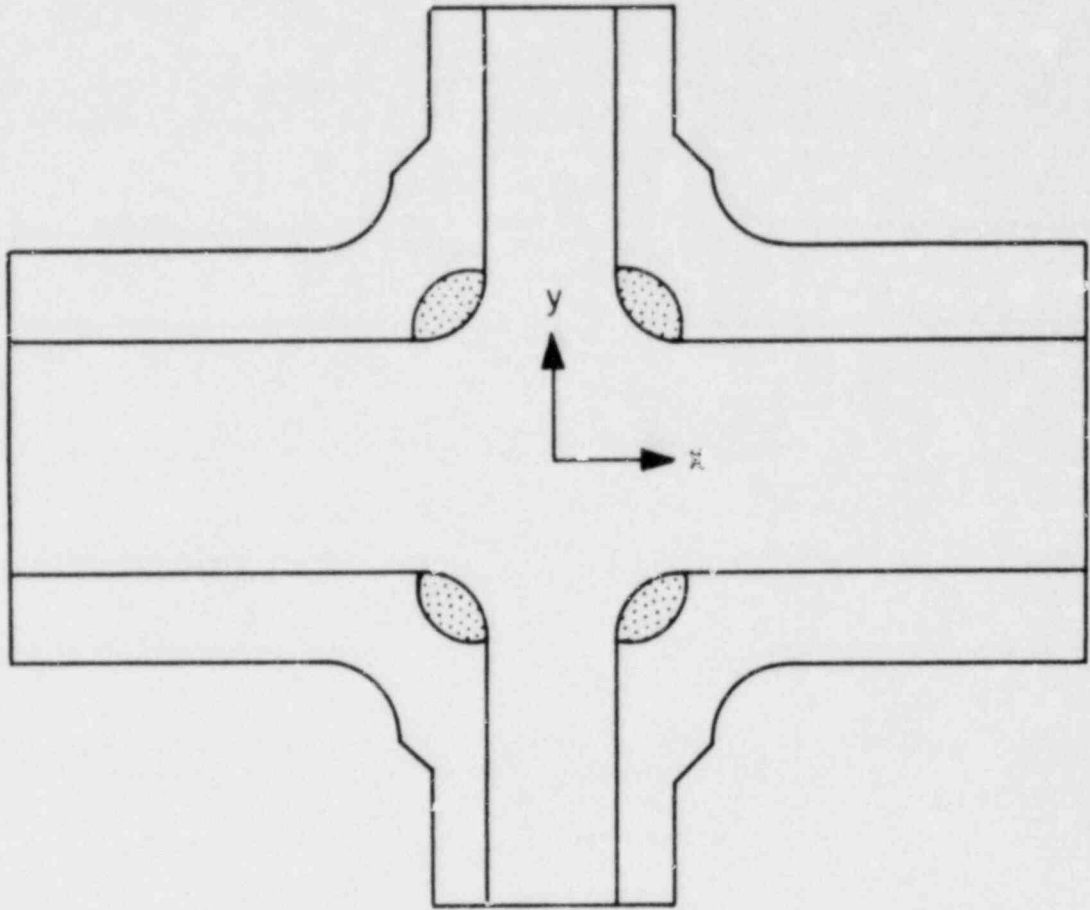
Nozzle corner flaw configuration with threefold symmetry
